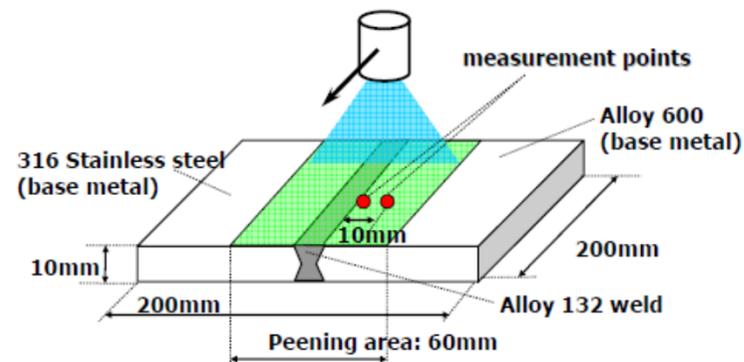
The mockup of butt weld for RV Nozzle safe-end
